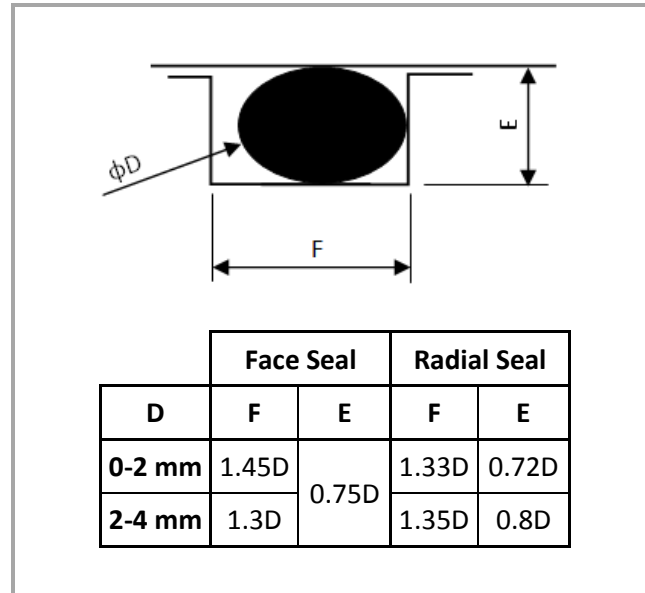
O-ring gland dimensions as per manufacturer design guidelines [32][33]
